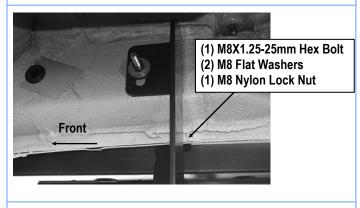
Passenger Side 2nd & 3rd Mounting Locations
